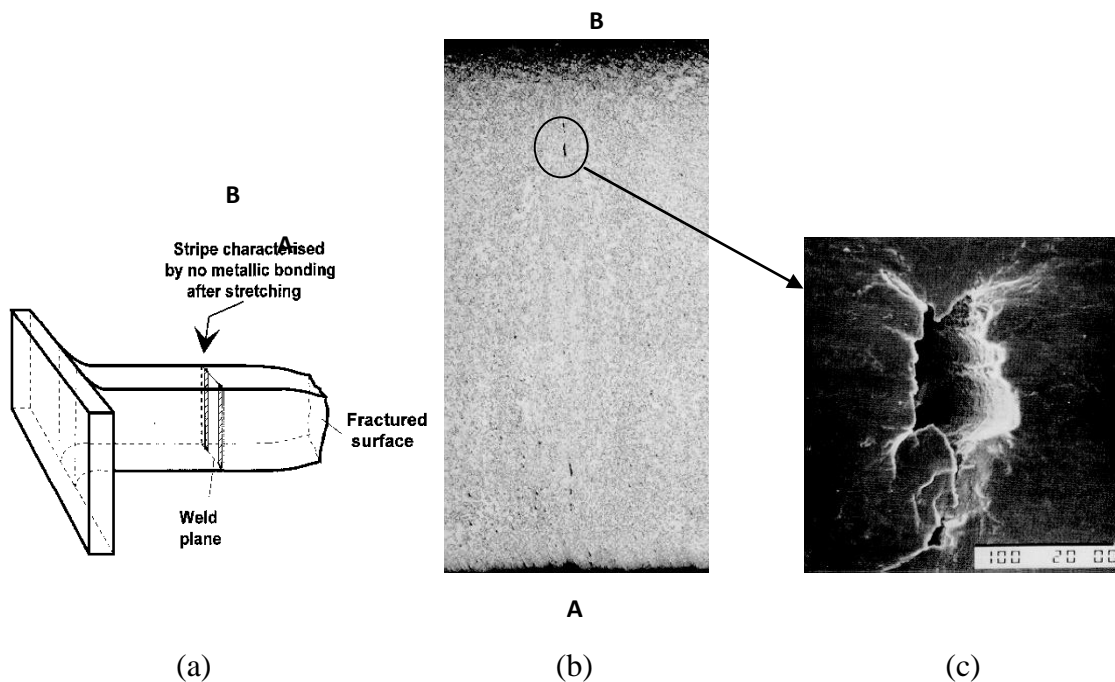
Tensile test specimen that fractured outside the seam weld; (a) One “half” of the fractured specimen, (b) Defect in the microstructure in inferior extrusion weld and (d) Extrusion defect in stretched specimen as viewed in SEM.
